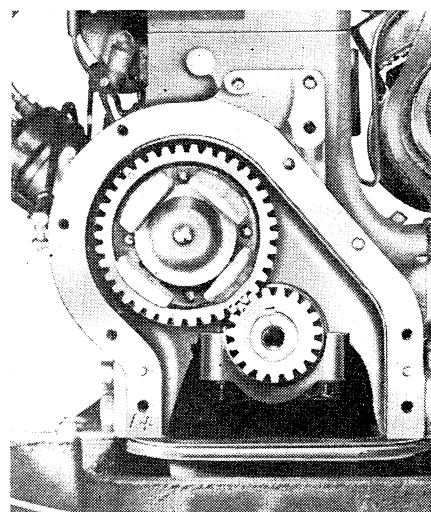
Pony timing gears, showing position of governor weights and carrier, attached to camshaft gear.
